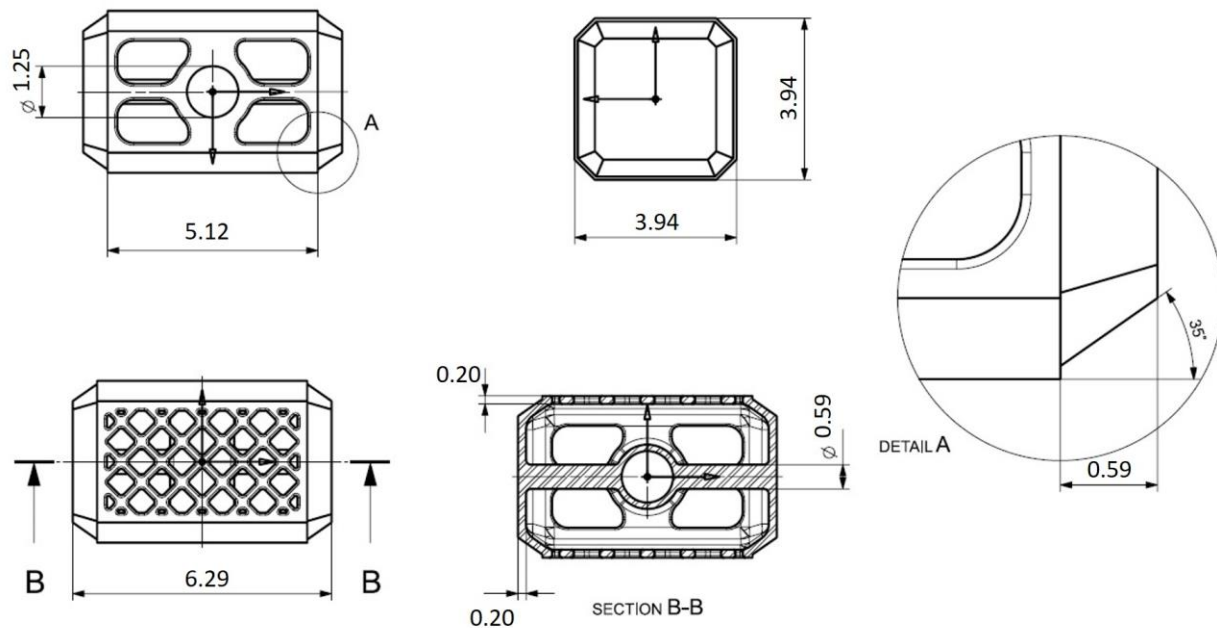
Technical drawing of final design. Detail A shows extrusion of striking faces and internal detailing is provided by section B-B.
